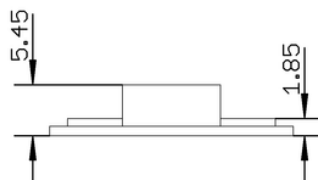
L3xxC-xyyyzz Mechanical Drawing
